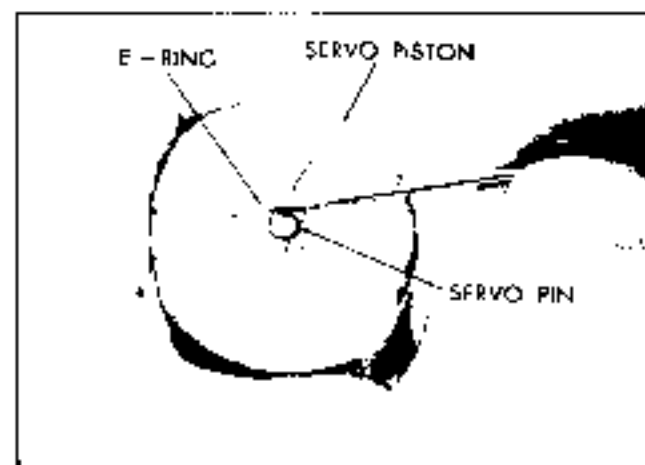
E-62 Removing Retaining E-Ring from Rear Servo Pin
